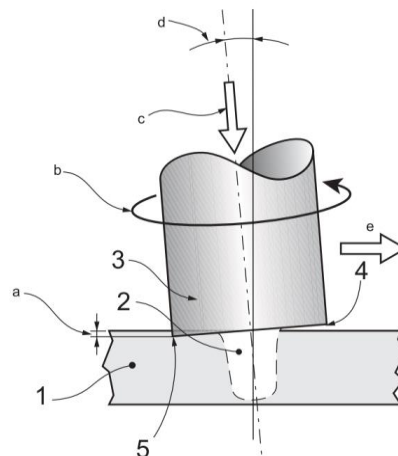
Side view of butt joint. 1-workpiece; 2-probe; 3-tool; 4-shoulder (leading edge); 5-heel (shoulder trailing edge); a-Heel plunge depth; b-Direction of tool rotation; c-Axial force; d-Tilt angle; e-Direction of welding [2-13].
